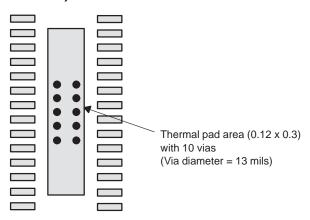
PowerPAD™ PCB Etch and Via Pattern
